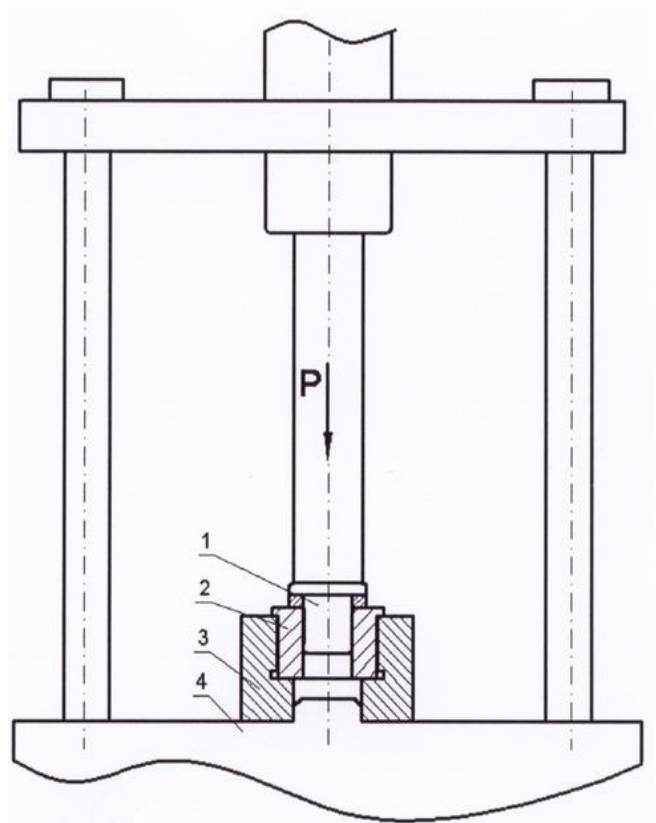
Scheme of equipment ZwickZ100 (1 – spindle, 2 – bush, 3 – based detail's extra equipment, 4 – frame).
